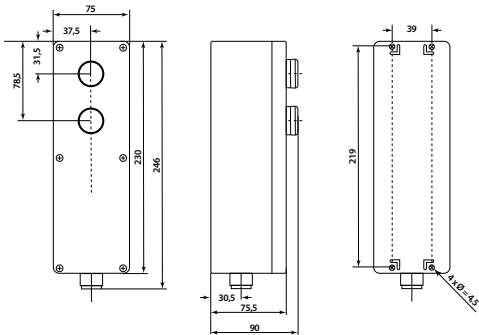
Views: front, side, bottom (Dim. in mm, decimal separator = ,)
